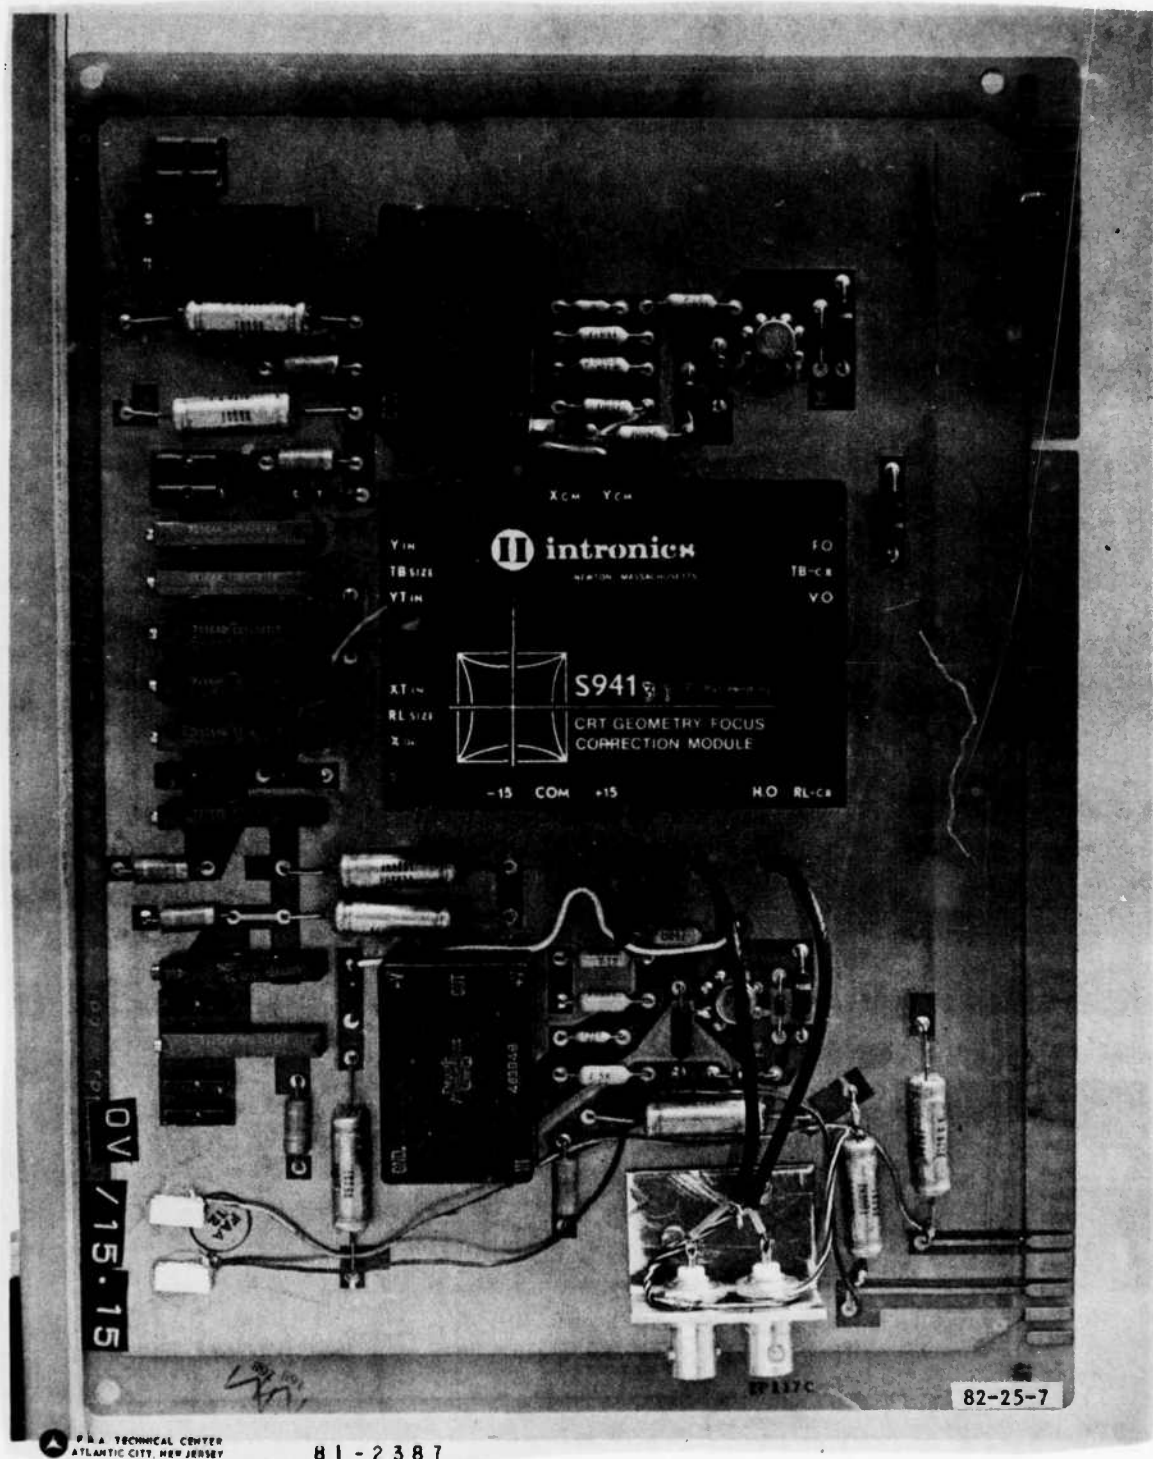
MODIFIED A5 PCB — DRIVER PVD
